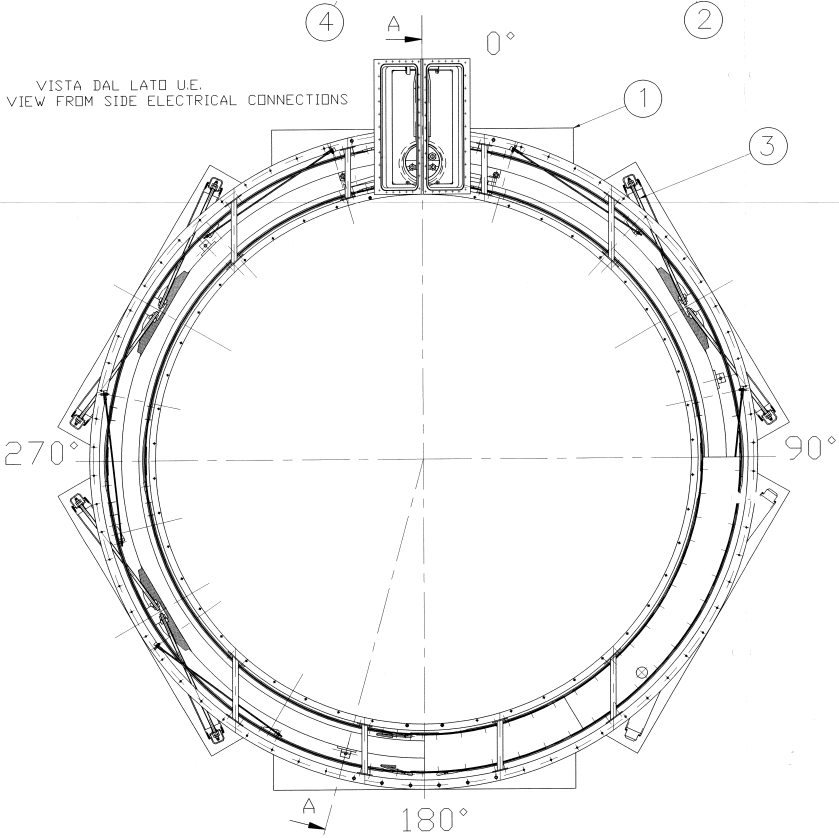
Original Ansaldo drawing: Cryostat Assembly
